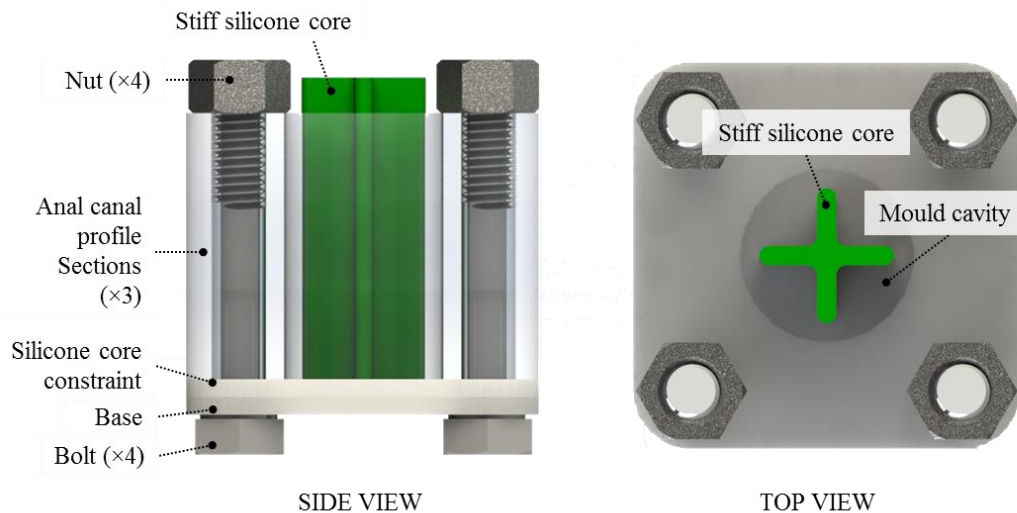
SolidWorks render of the sphincter mould, indicating its features and components.
